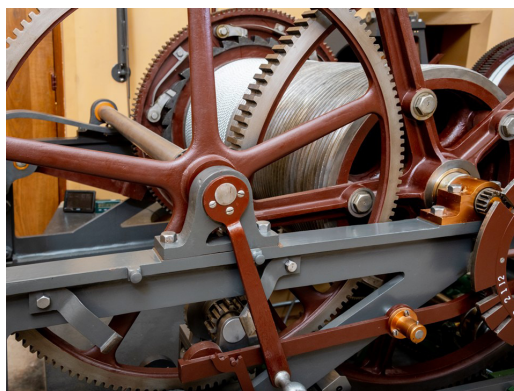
Eccentric bush and lever used in disengaging the winding pinion. Image Lumen Photography.
